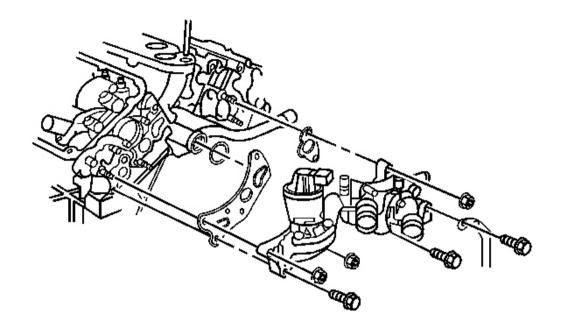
View Of Crossover Pipe & Crossover Pipe Bolts Courtesy of GENERAL MOTORS CORP.
